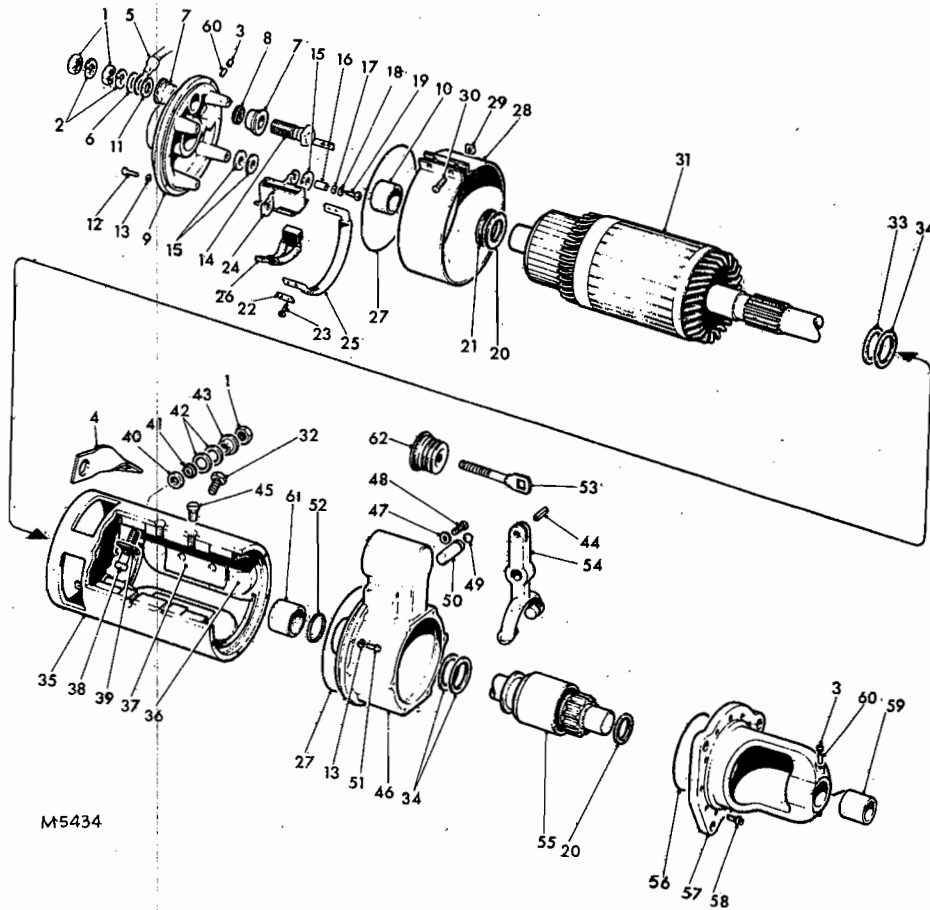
TYPICAL STARTER MOTOR ASSEMBLY
